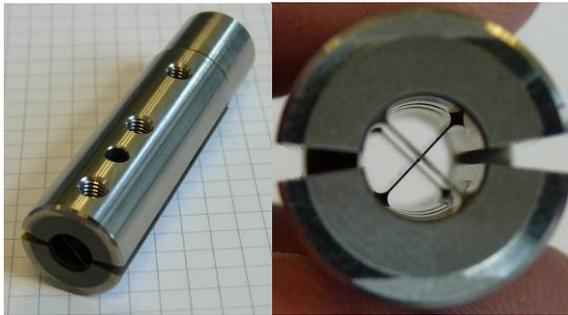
Flexural pivot (left) and section view showing the 3 blades crossing (right).
